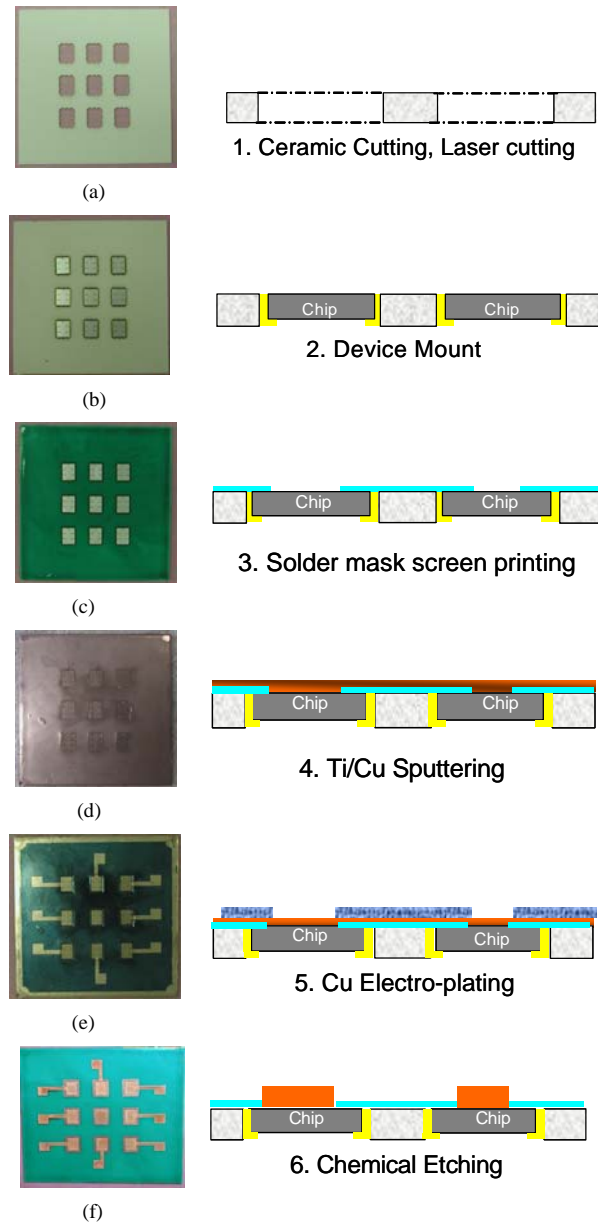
Manufacturing process of test sample (a) laser cut substrate; (b) chip mounting; (c)solder mask screening; (d) sputtering copper; (e) photo resist; (f) final sample;
